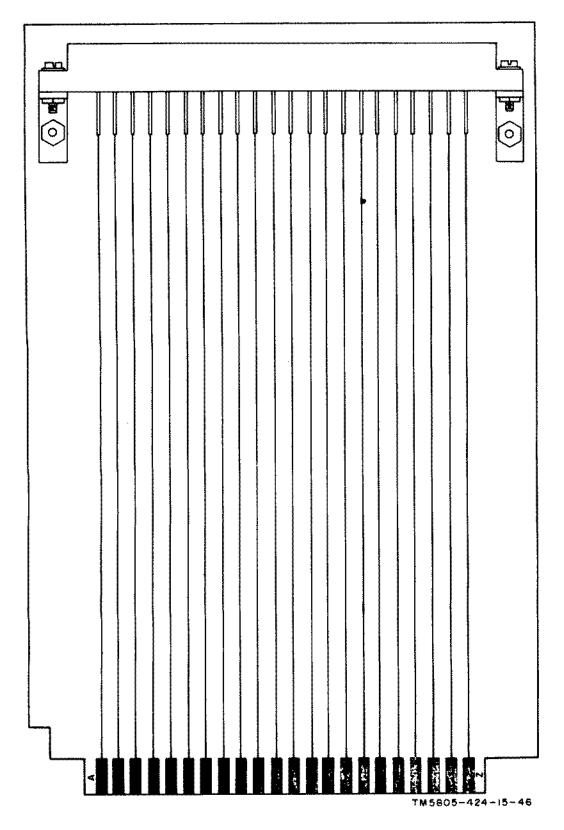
Printed-circuit card assembly A13 (PC 80034010), adapter card diagram.
